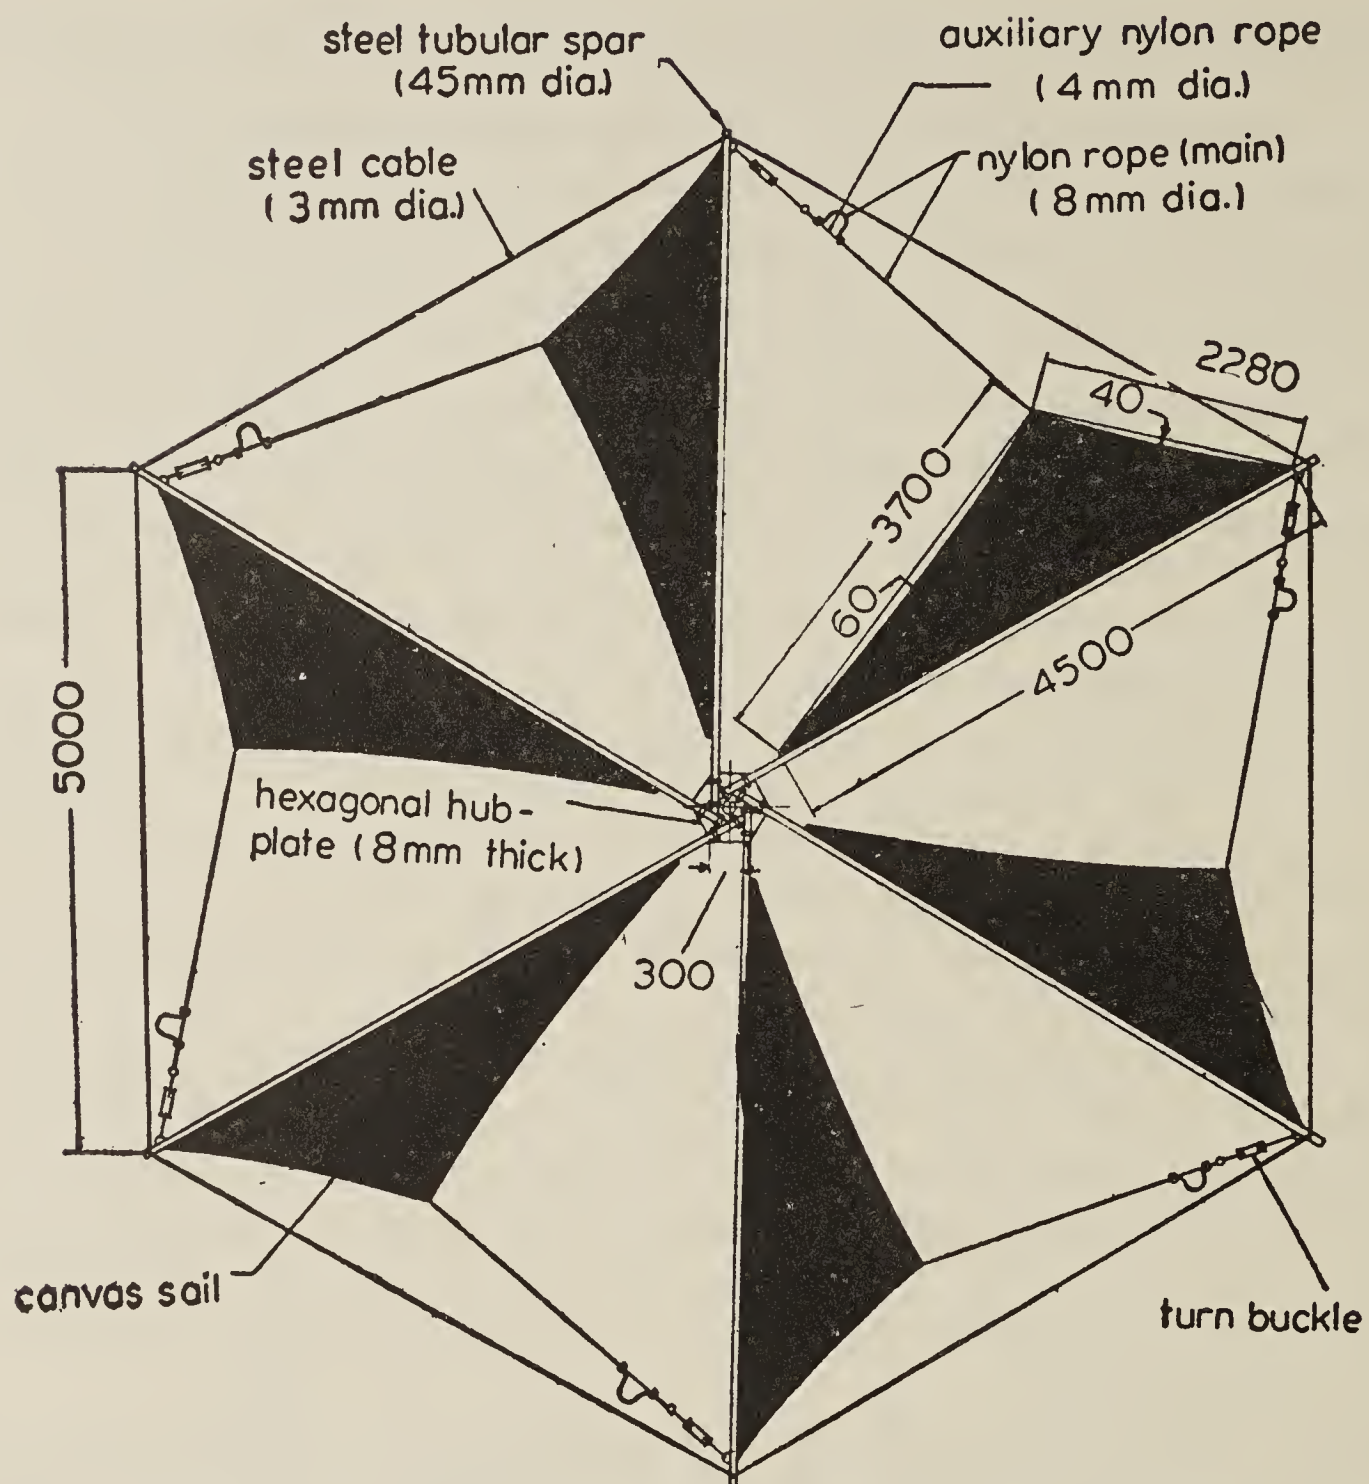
Rotor assembly showing details of sails, safety loops and spars.
